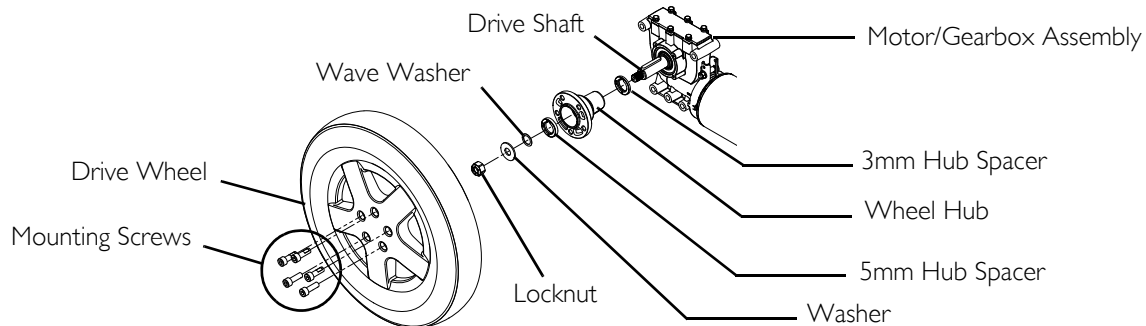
Removing/Installing the SSD Motor Drive Wheel/Wheel Hub
